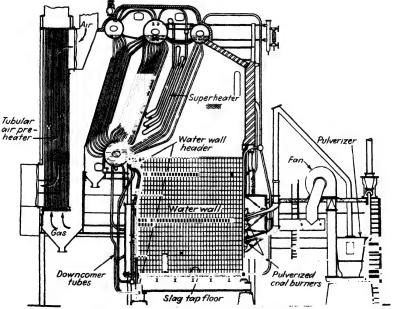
Stirling boiler. (Babcock and Wilcox Company.)
